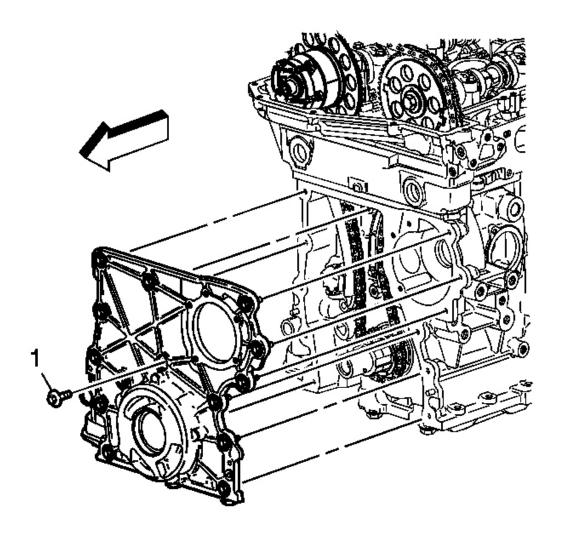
View Of Engine Front Cover & Bolts Courtesy of GENERAL MOTORS CORP.
